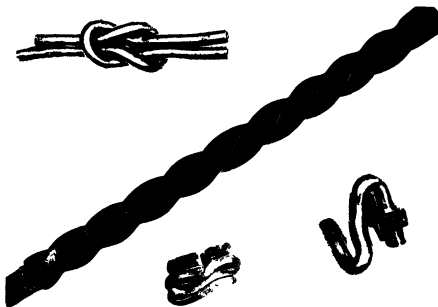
Specimens cut entirely from deposited weld metal showing the typical ductility of the Smith weld
